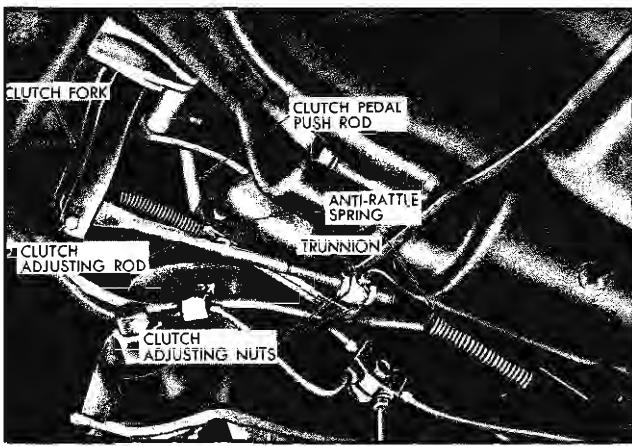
D-5 Clutch Adjusting Rod (V-8)
